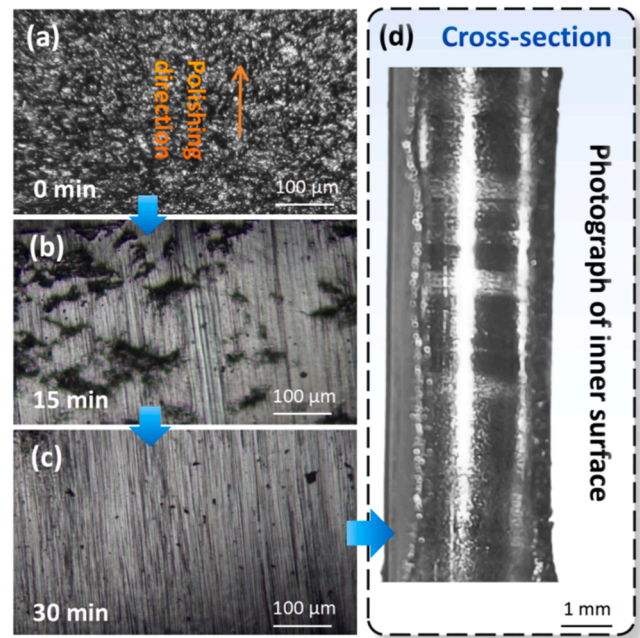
Surface morphology of inner surface before and after polishing by using shape-3 magnet. (a) $T = 0$ min. (b) $T = 15$ min. (c) $T = 30$ min. (d) Photograph of the inner surface after polishing 30 min.
